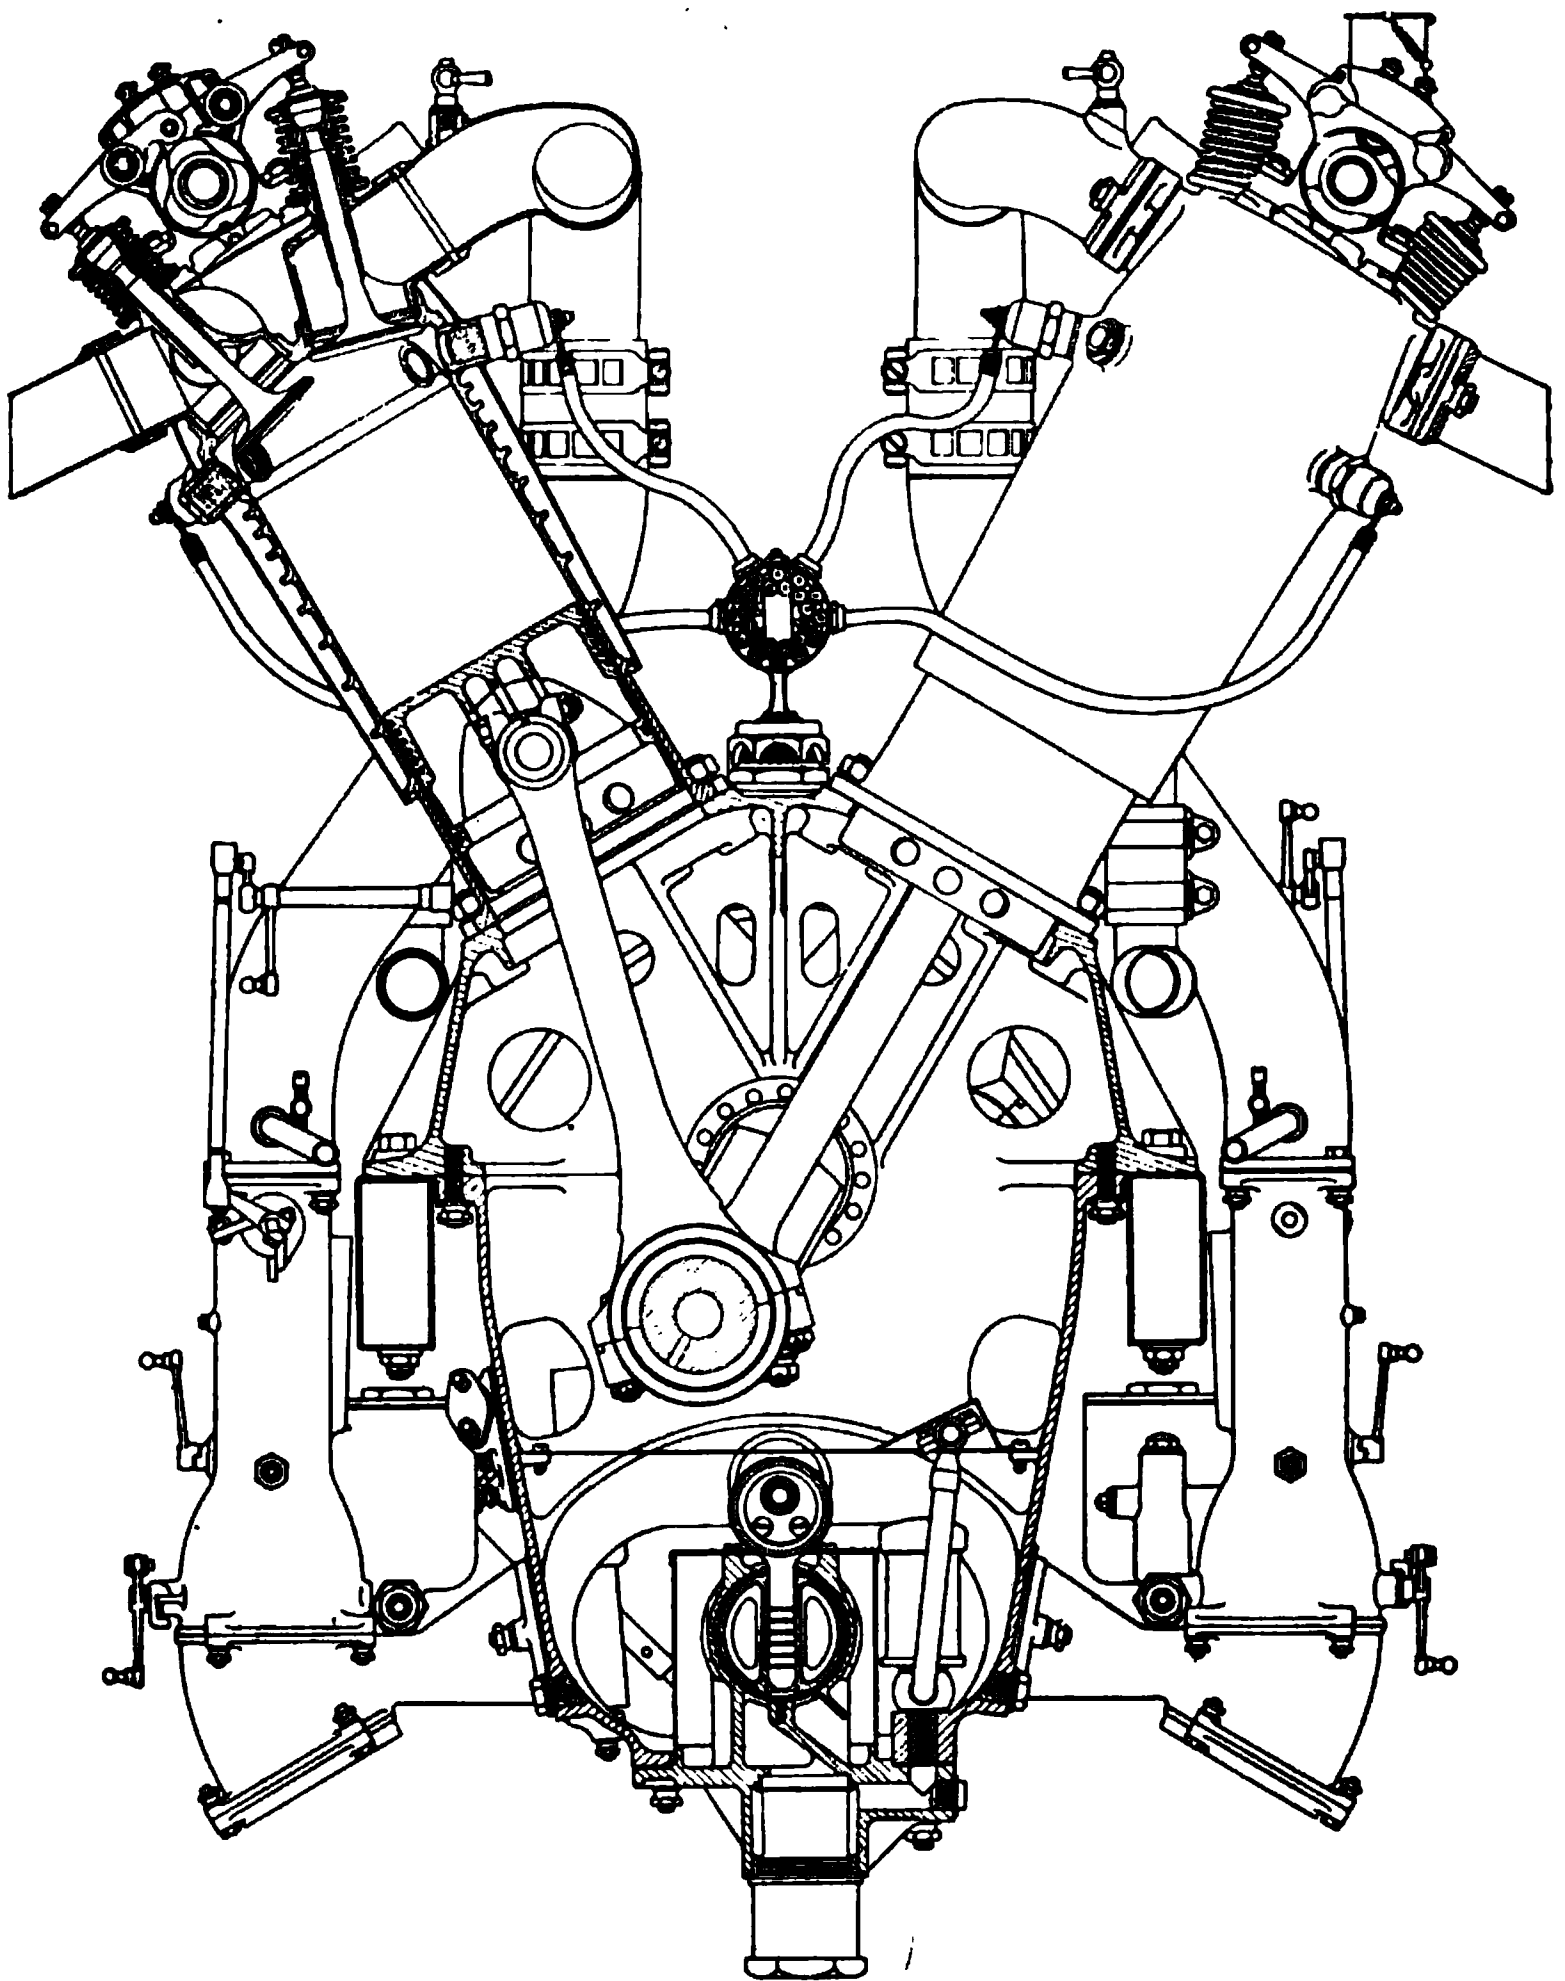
Transverse Section of Lorraine-Dietrich Twelve-Cylinder Engine.
